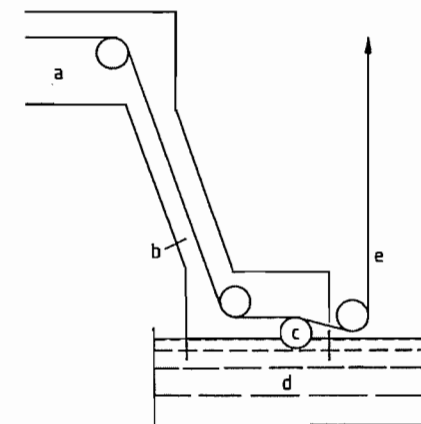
Coating steel strip on one side only (Nippon Steel): a) Furnace; b) N₂ atmosphere; c) Coating roller; d) Zinc bath; e) Stripping nozzle.
